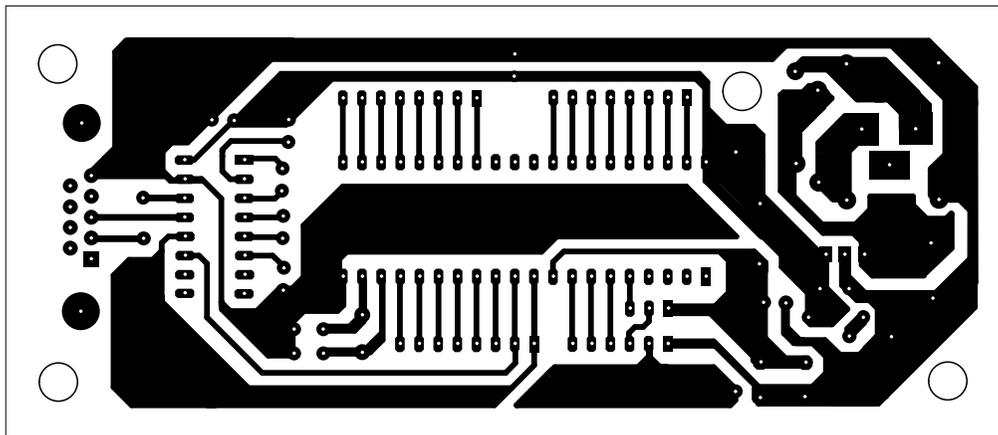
An actual-size, single-side PCB for the ATmega8515 development board
